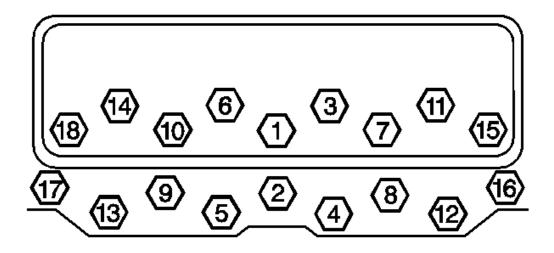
Cylinder Head Bolt Tightening Sequence Courtesy of GENERAL MOTORS CORP.
